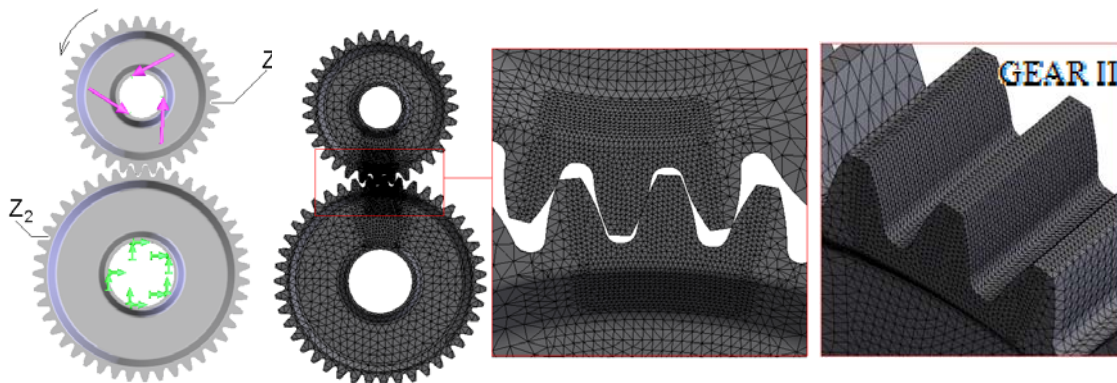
Boundary Conditions and Meshing Construction for Gear I and Gear II
